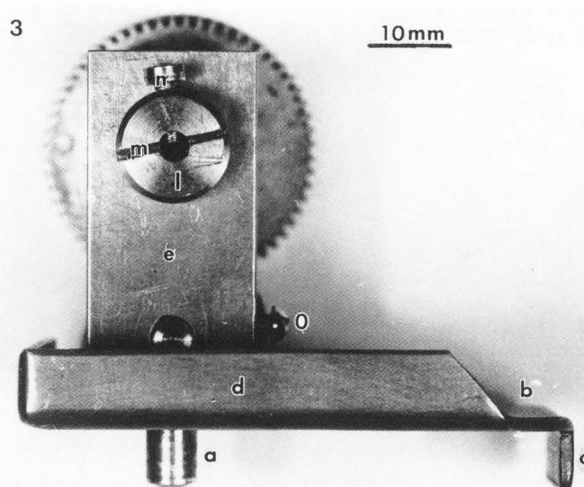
The assembled ninety degree tilt module showing: - 6 mm pin (a); base plate (b); locking flange (c); electron shadow flange (d); main body (e); lock screw (k); geared driven upper wheel (j); stub holder (O) stub lock screw (n) slot (m).
